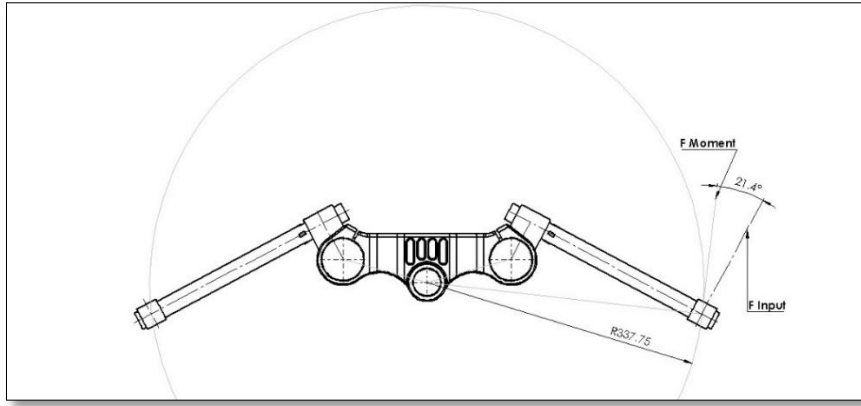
SolidWorks Drawing of Steering Assembly on the Measurement Platform.
